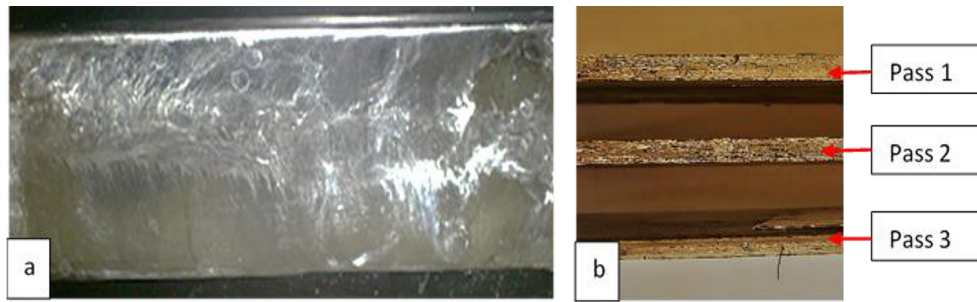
(a) Sheet metal after casing process (160*45*5 mm), (b) first pass (3 mm), second pass (2 mm), and third pass (1.3 mm)
